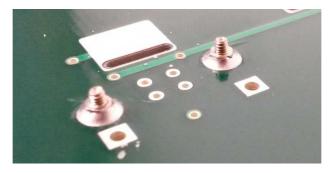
Deployment mechanism, soldered nuts on reverse side
